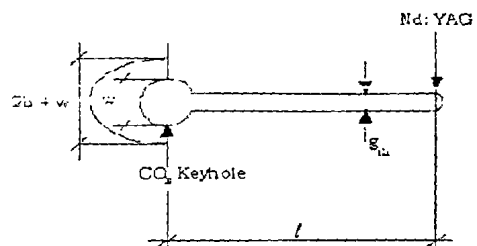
The cut and weld model showing slot and keyhole sizes.
